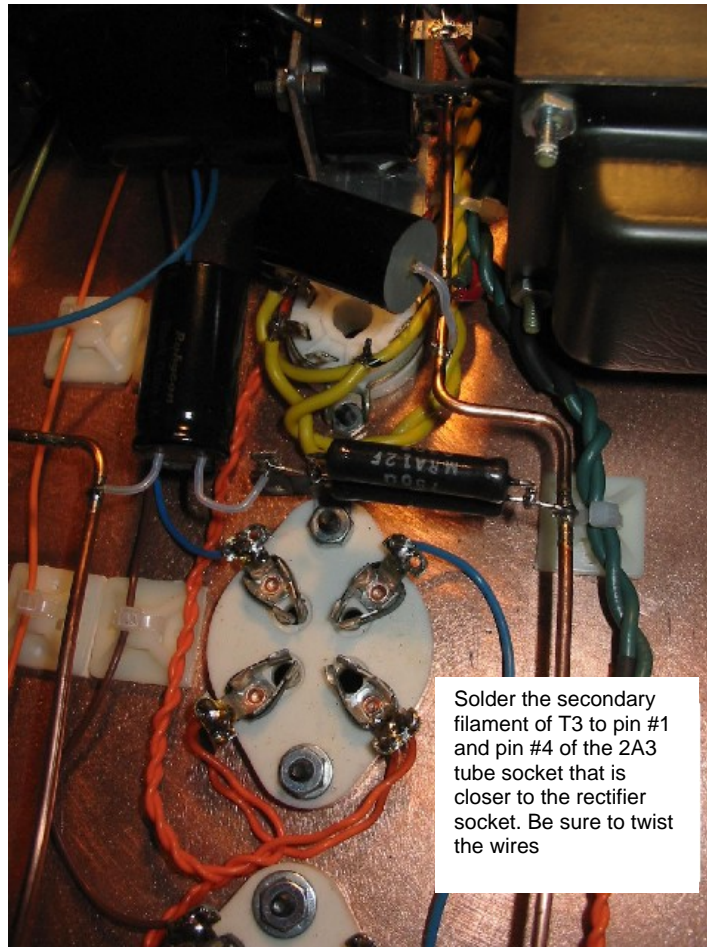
Soldering the secondary winding of  $T_3$  to the rearmost 2A3 socket.
